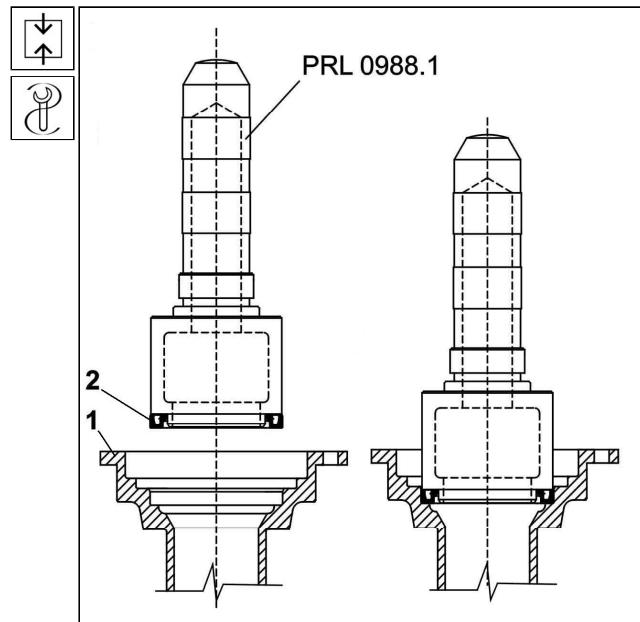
Pressing-in the shaft seal 60x80x8
